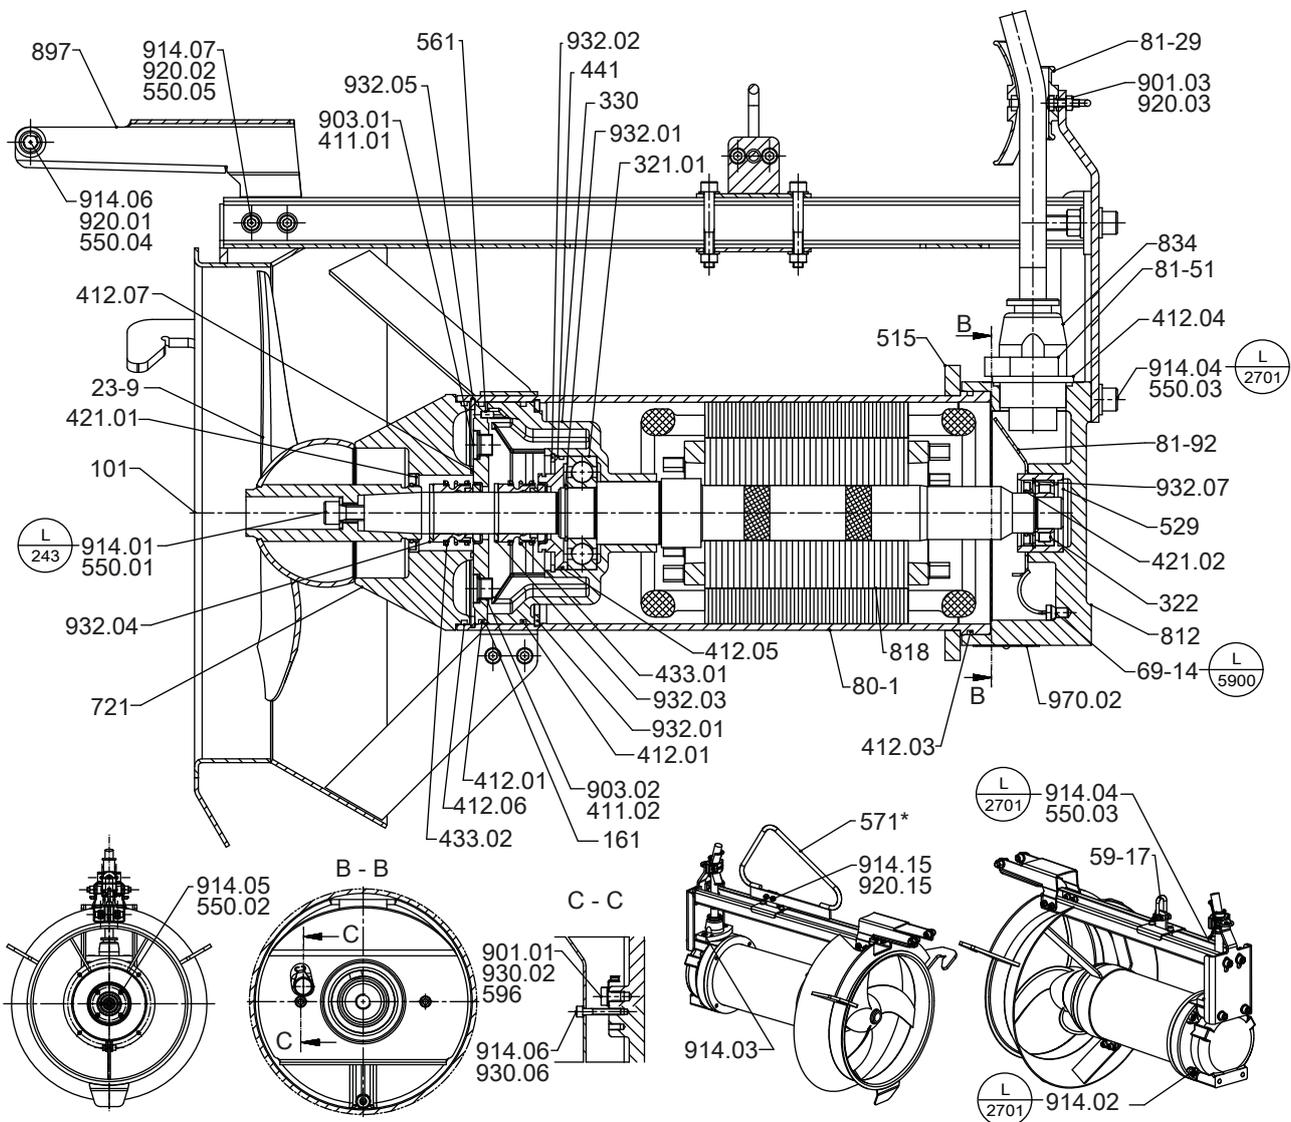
General assembly drawing: a) with shackle b) with bail (optional)
